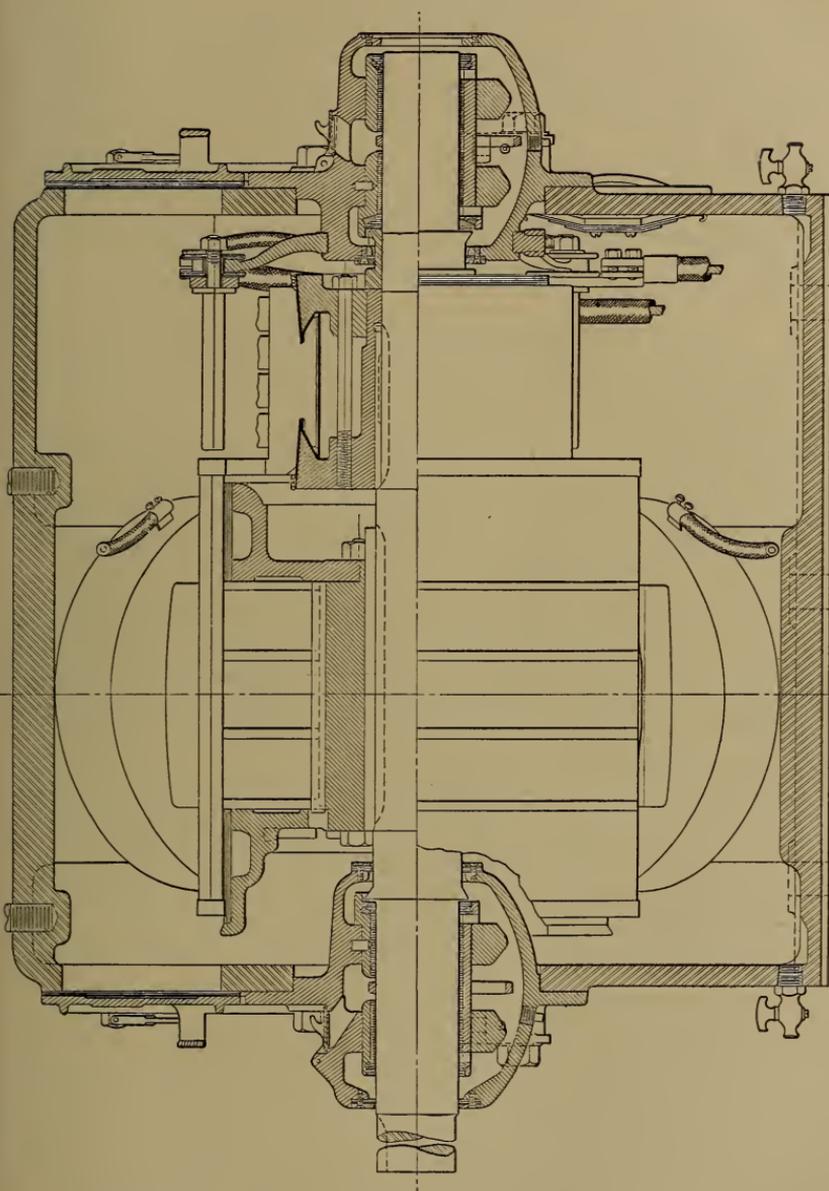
Longitudinal Section of Type CB-25 Motor.
